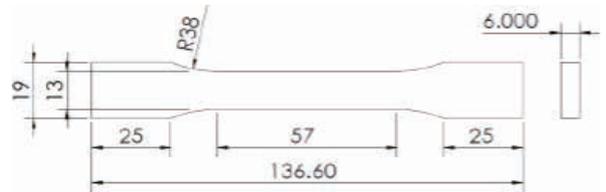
Specimen for tensile testing, dimensions in millimeters.
